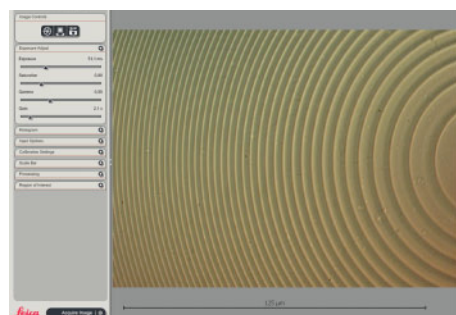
Moulded micro-fresnel lens surface structure. The view shown is 125µm wide.
